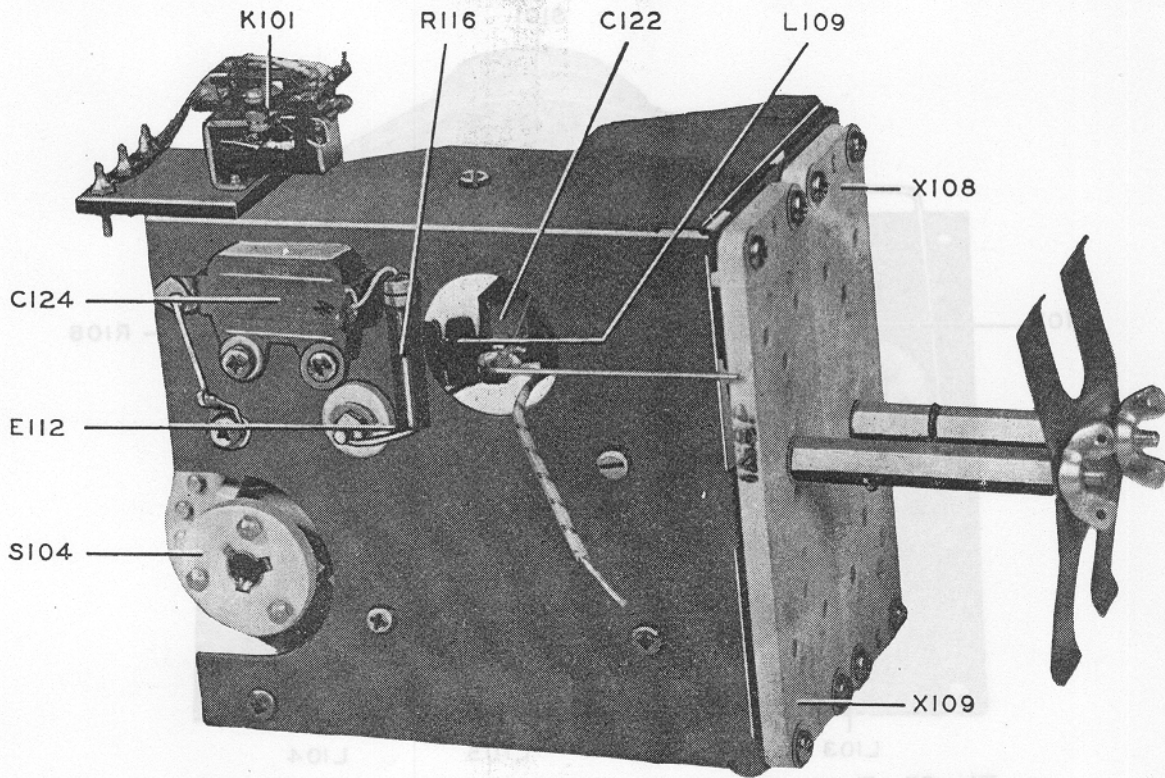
Transmitter Crystal Bracket Assembly—Top View
